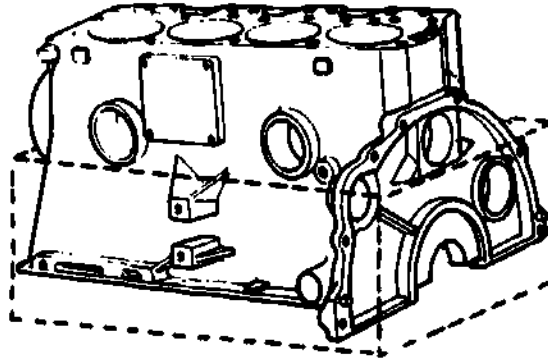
Four-cylinder engine block with crankcase enclosed by an imaginary box (left rear view).
